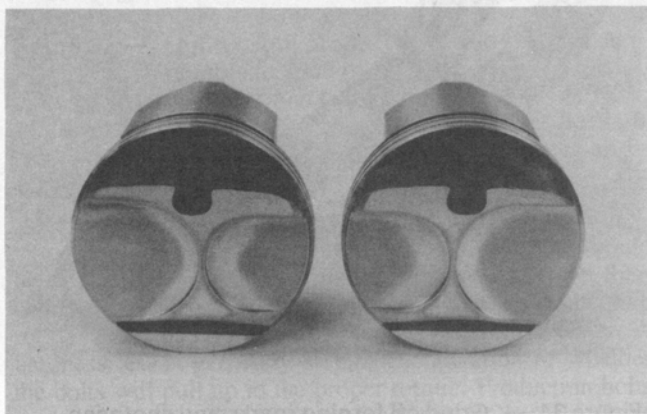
Modified heavy-duty pistons with machined valve reliefs.
